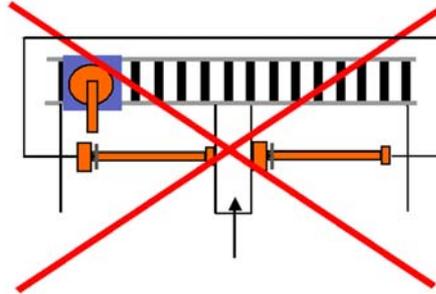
Travel track with a welding torch service unit mounted on a floor
